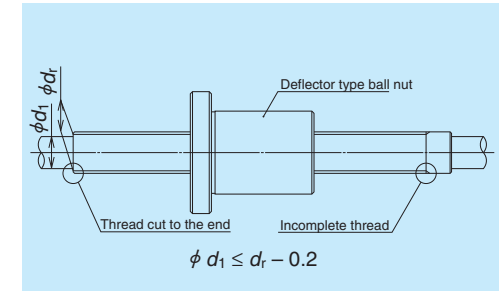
Shaft end of a deflector recirculation system ball screw
